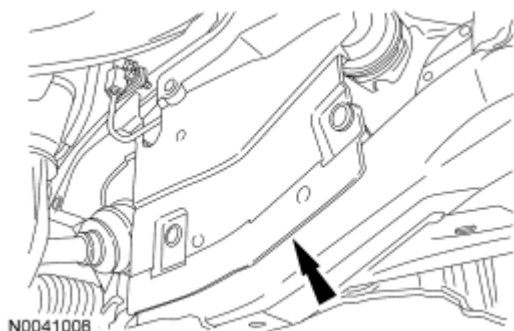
Locating LH Front Structure-To-Subframe Splash Shield
